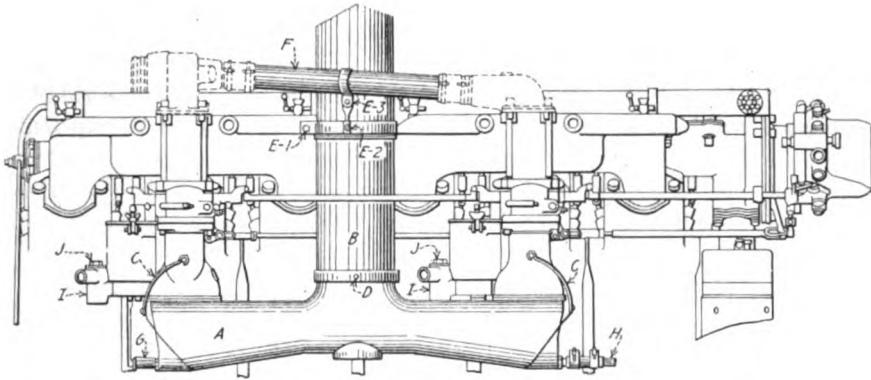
Longitudinal elevation showing revised carburetor arrangement.
